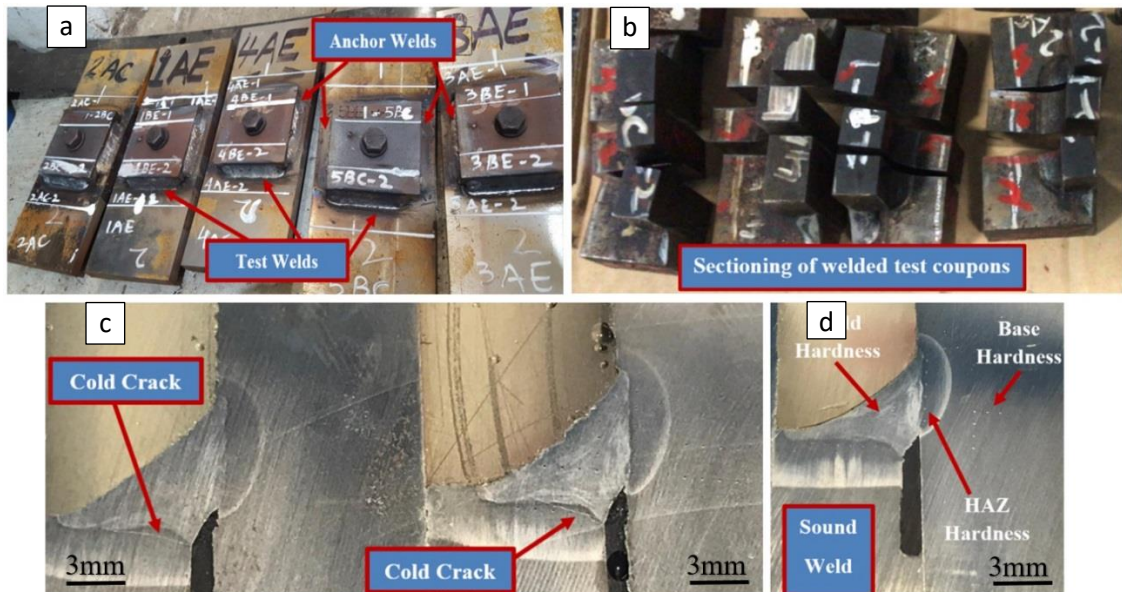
(a) Welded test pieces during CTS testing, (b) cut coupons for metallographic examination, (c) optical imaging of cracks, and (d) hardness measurements.
